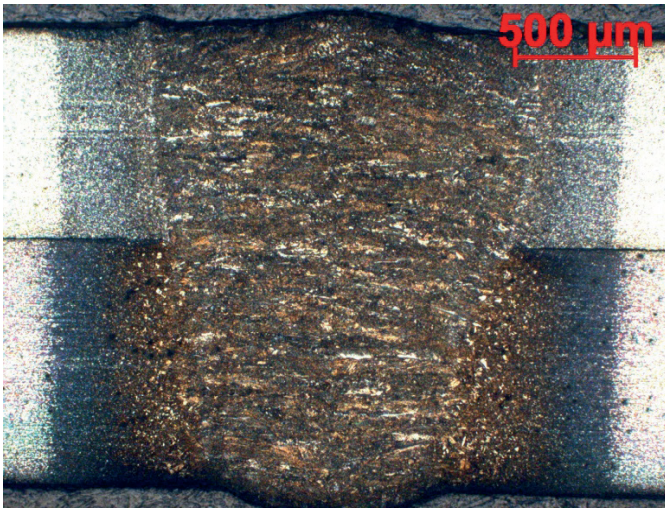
Macrostructure of the joint welded using a dual beam positioned perpendicularly in relation to the direction of welding, welding rate: 5 m/s, distance between the beams: 0.6 mm
